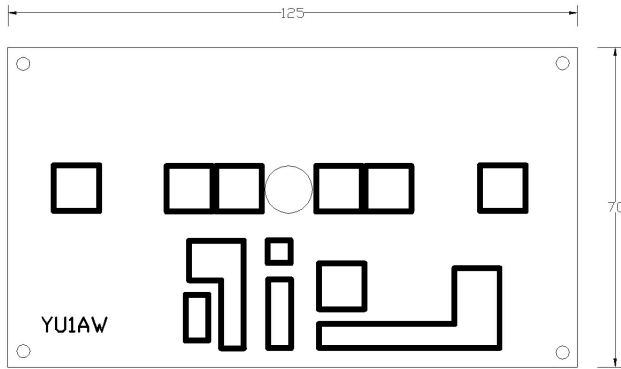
PCB layout for the one transistor power amplifier. The illustration should be re-scaled as shown
